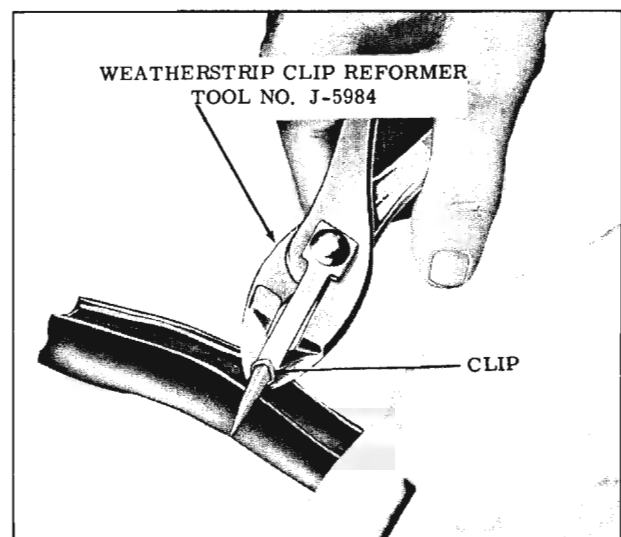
Reforming Weatherstrip Clips With Tool J-5984
